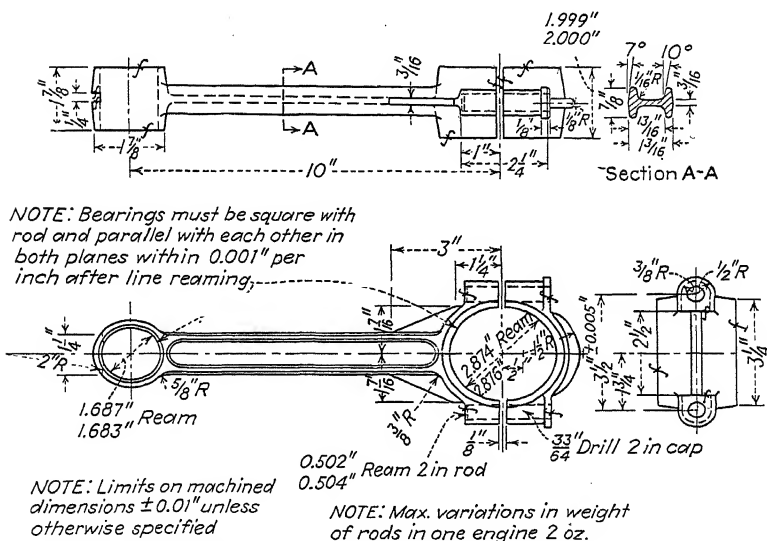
Connecting rod for a 4- by 5-in. in-line engine. (From Huebotter, "Mechanics of the Gasoline Engine.")
